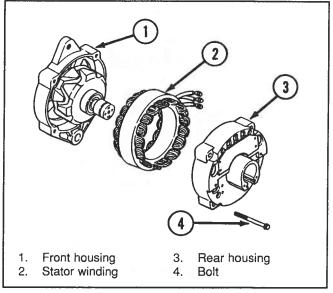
Assembling Front Housing, Stator And Rear Housing
